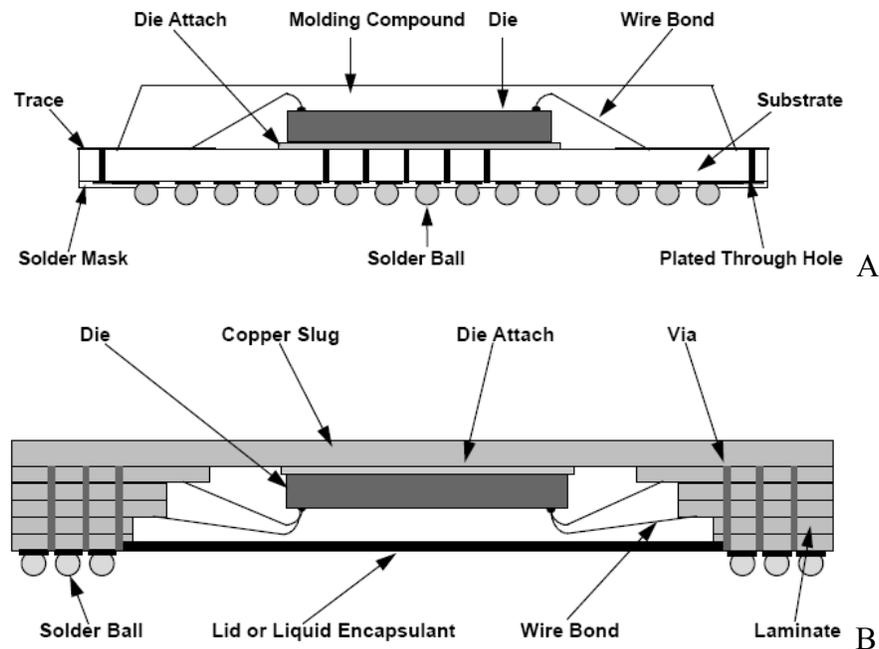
Die-up and die-down BGA package. A) Die-up BGA package. B) Die-down BGA package.
